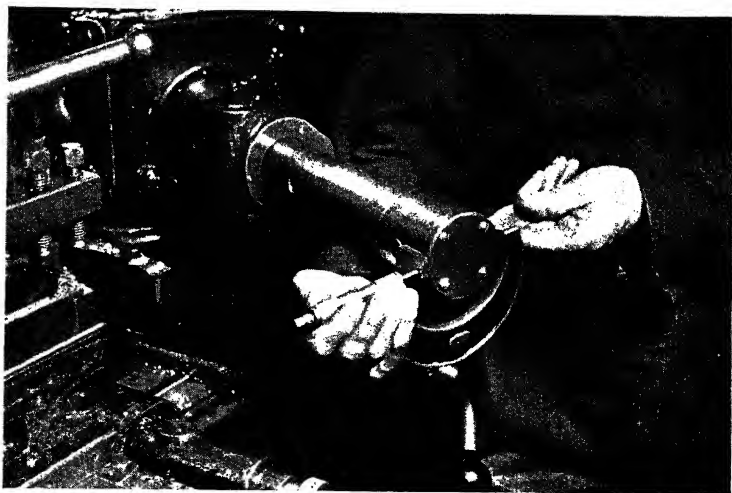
PRODUCTION OF LARGE MACHINED FITTING ON NO. 8 WARD LATHE (2).
